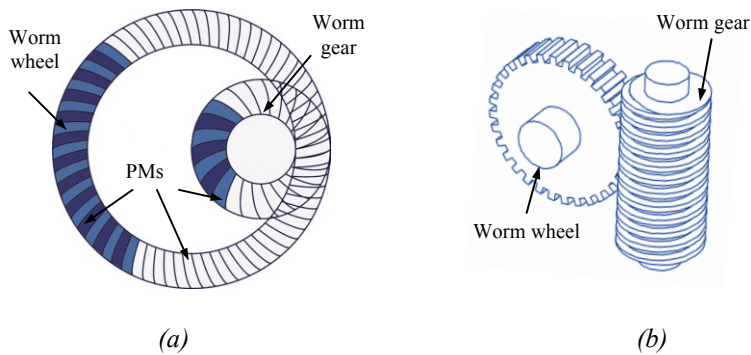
The worm gears, (a) magnetic worm gear, (b) mechanical counterpart.
